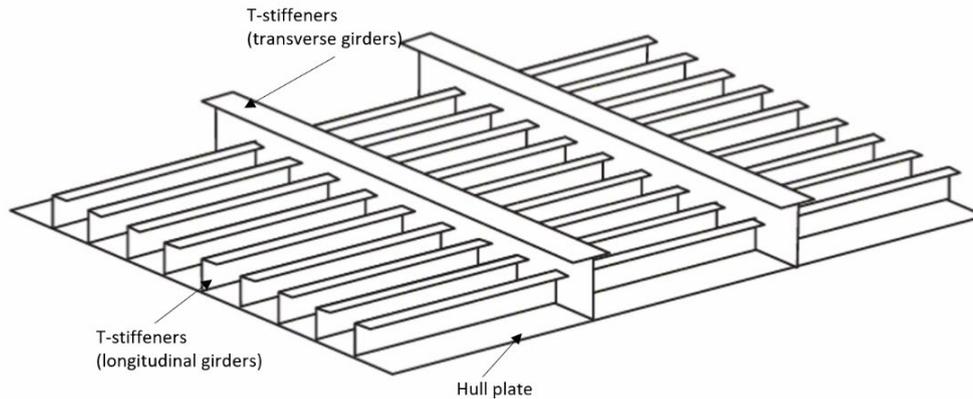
Cross section of stiffened plates in the base of a marine structure (Yao & Fujikubo, 2016)
